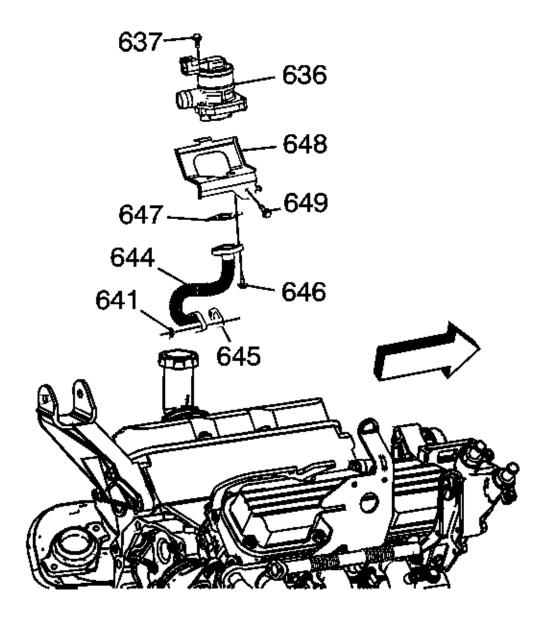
Secondary Air Injection Assembly Courtesy of GENERAL MOTORS CORP.
